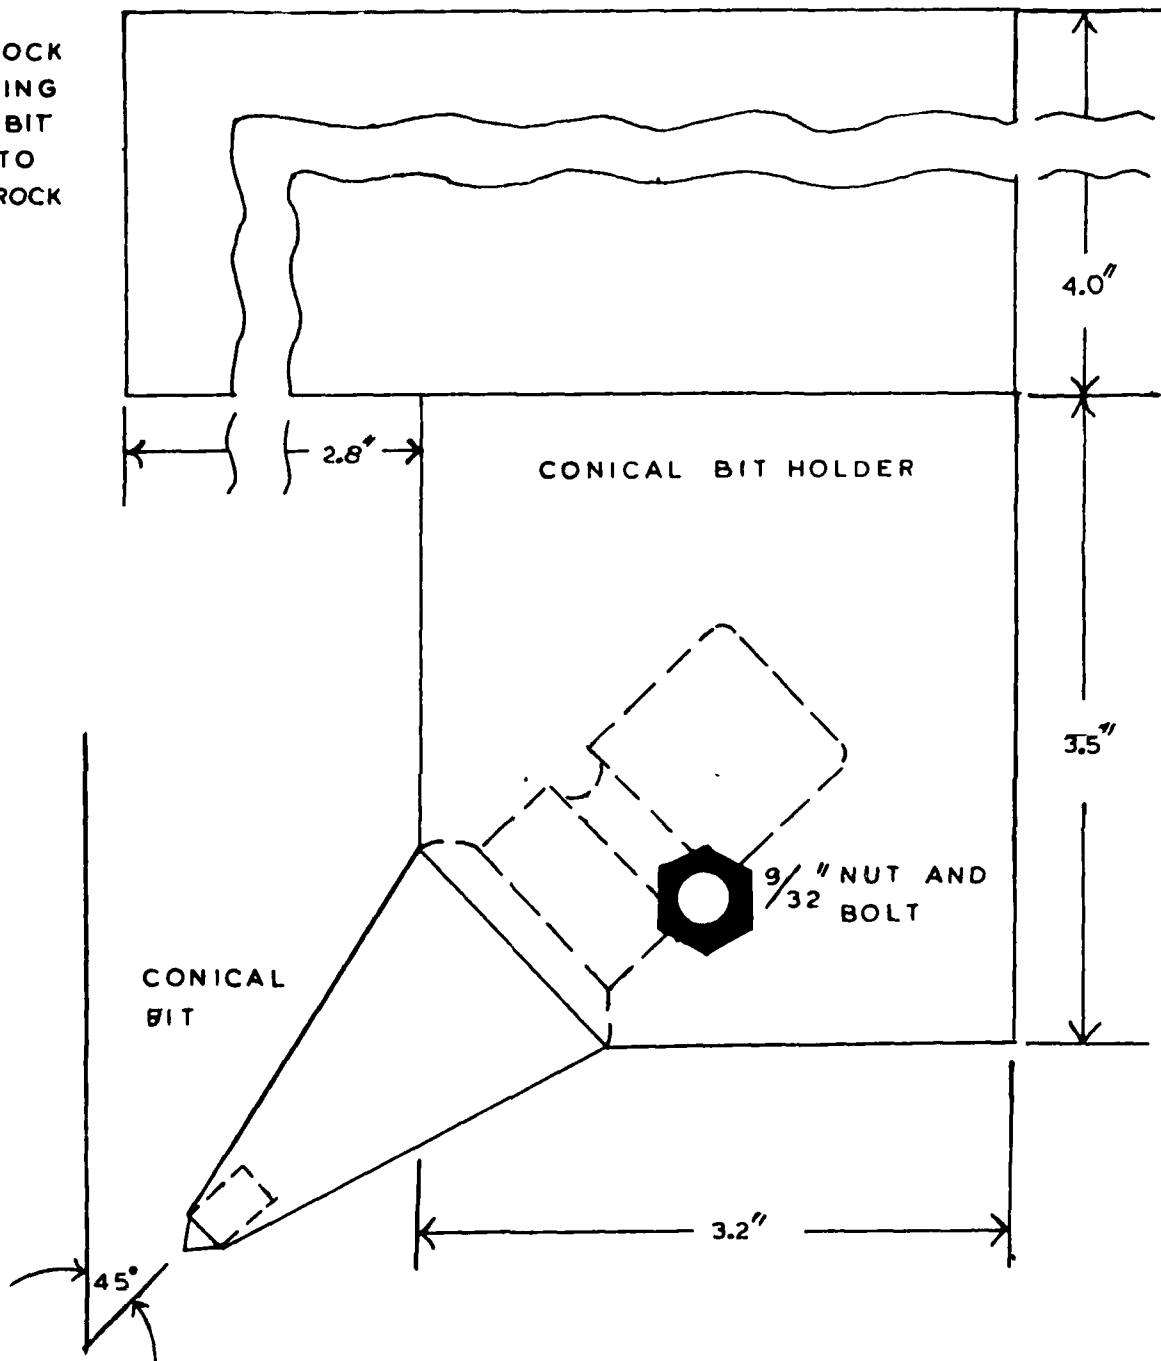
Conical Bit Holder Used in Testing With the Linear Rock Cutter.
